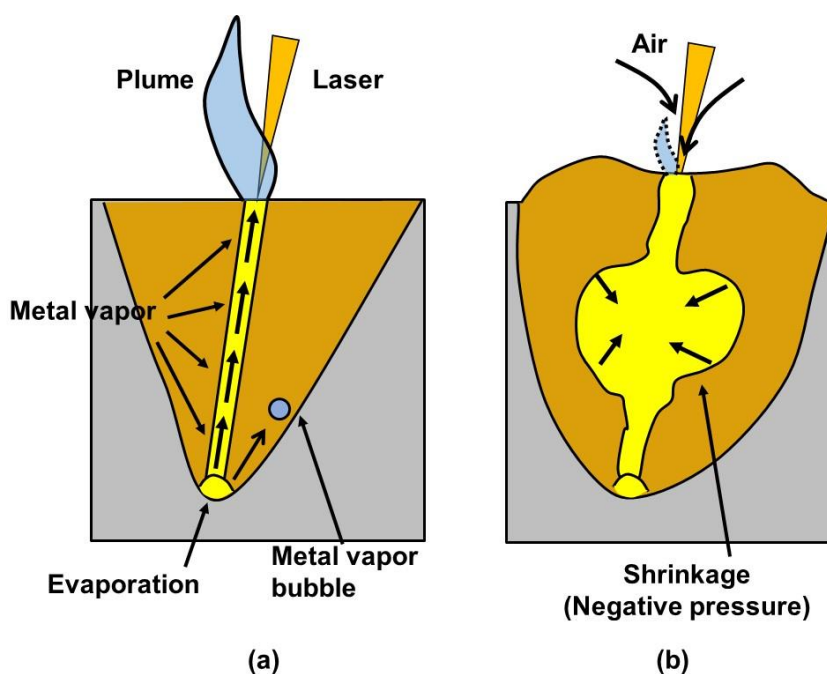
Mechanism of porosity formation based on keyhole behavior (a) Weld speed: 17 mm/s, Fan: On, (b) Weld speed: 8 mm/s and/or Fan: Off.
